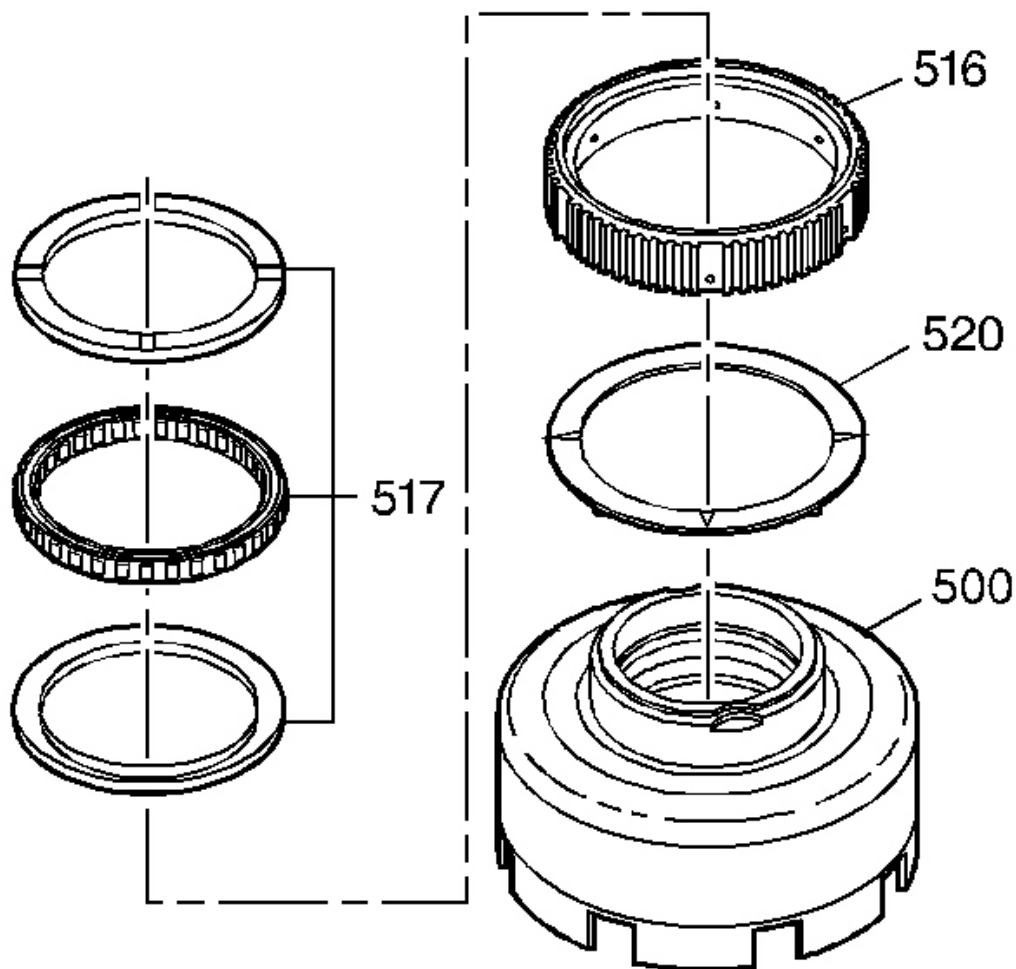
Installing 2nd Sprag Race And Clutch Assembly
